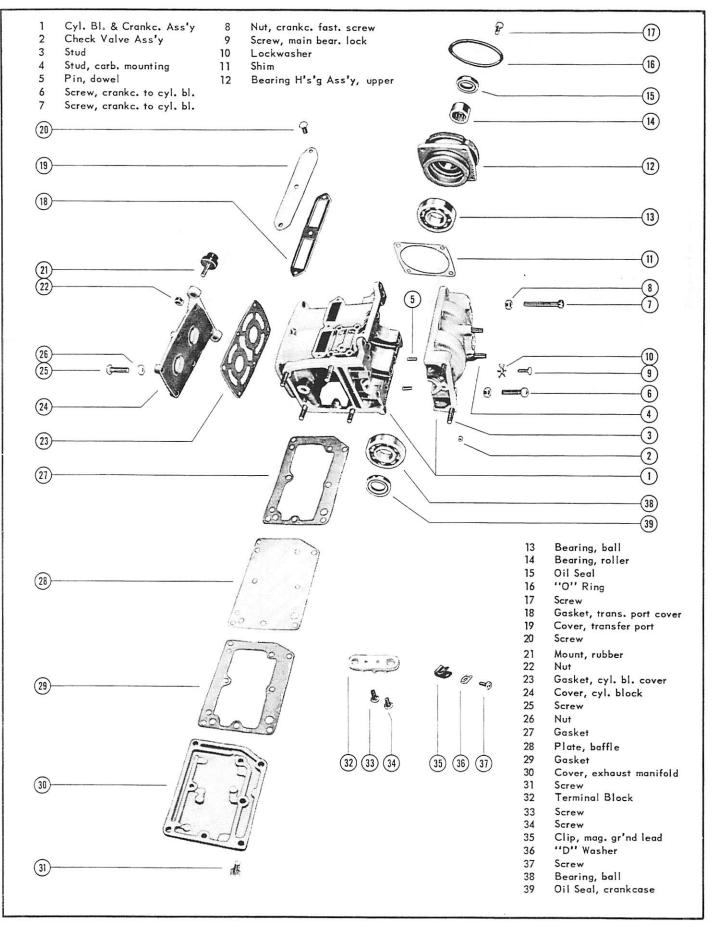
Cylinder Block and Crankcase Assembly, Merc 60
